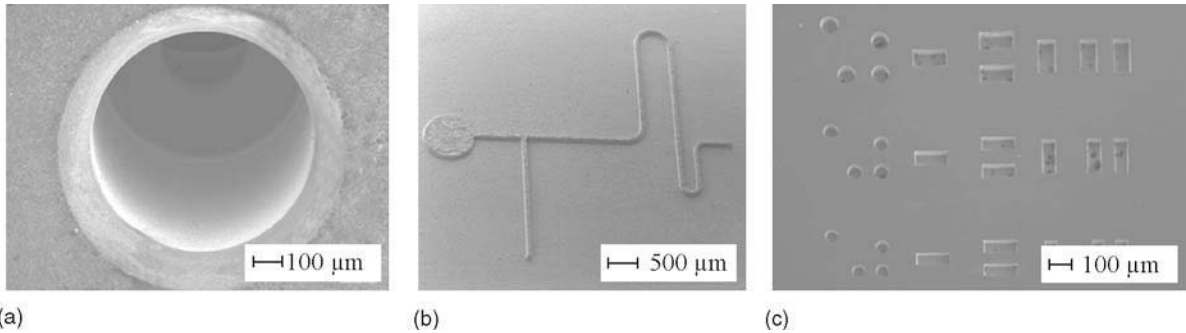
Micro-fabricated die for shaping small silver pins (a), mold insert for hot embossing fluidic micro-components ('lab-on-a-chip') (b), and mold insert with different referential structures (c).
